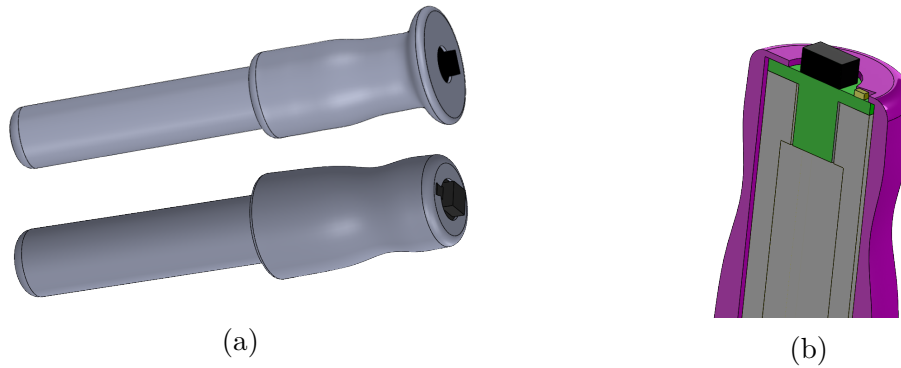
(a) 3D printed pen supports for the MEMS sensor; (b) Probe Tip section [40].
